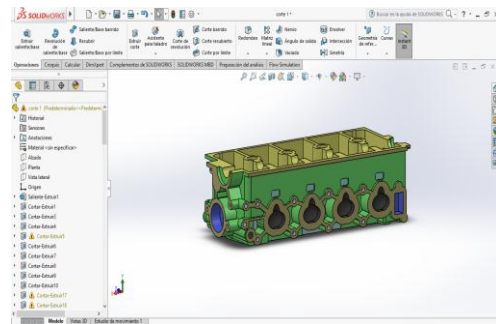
Complete graphic of modified cylinder head in Solidworks.
